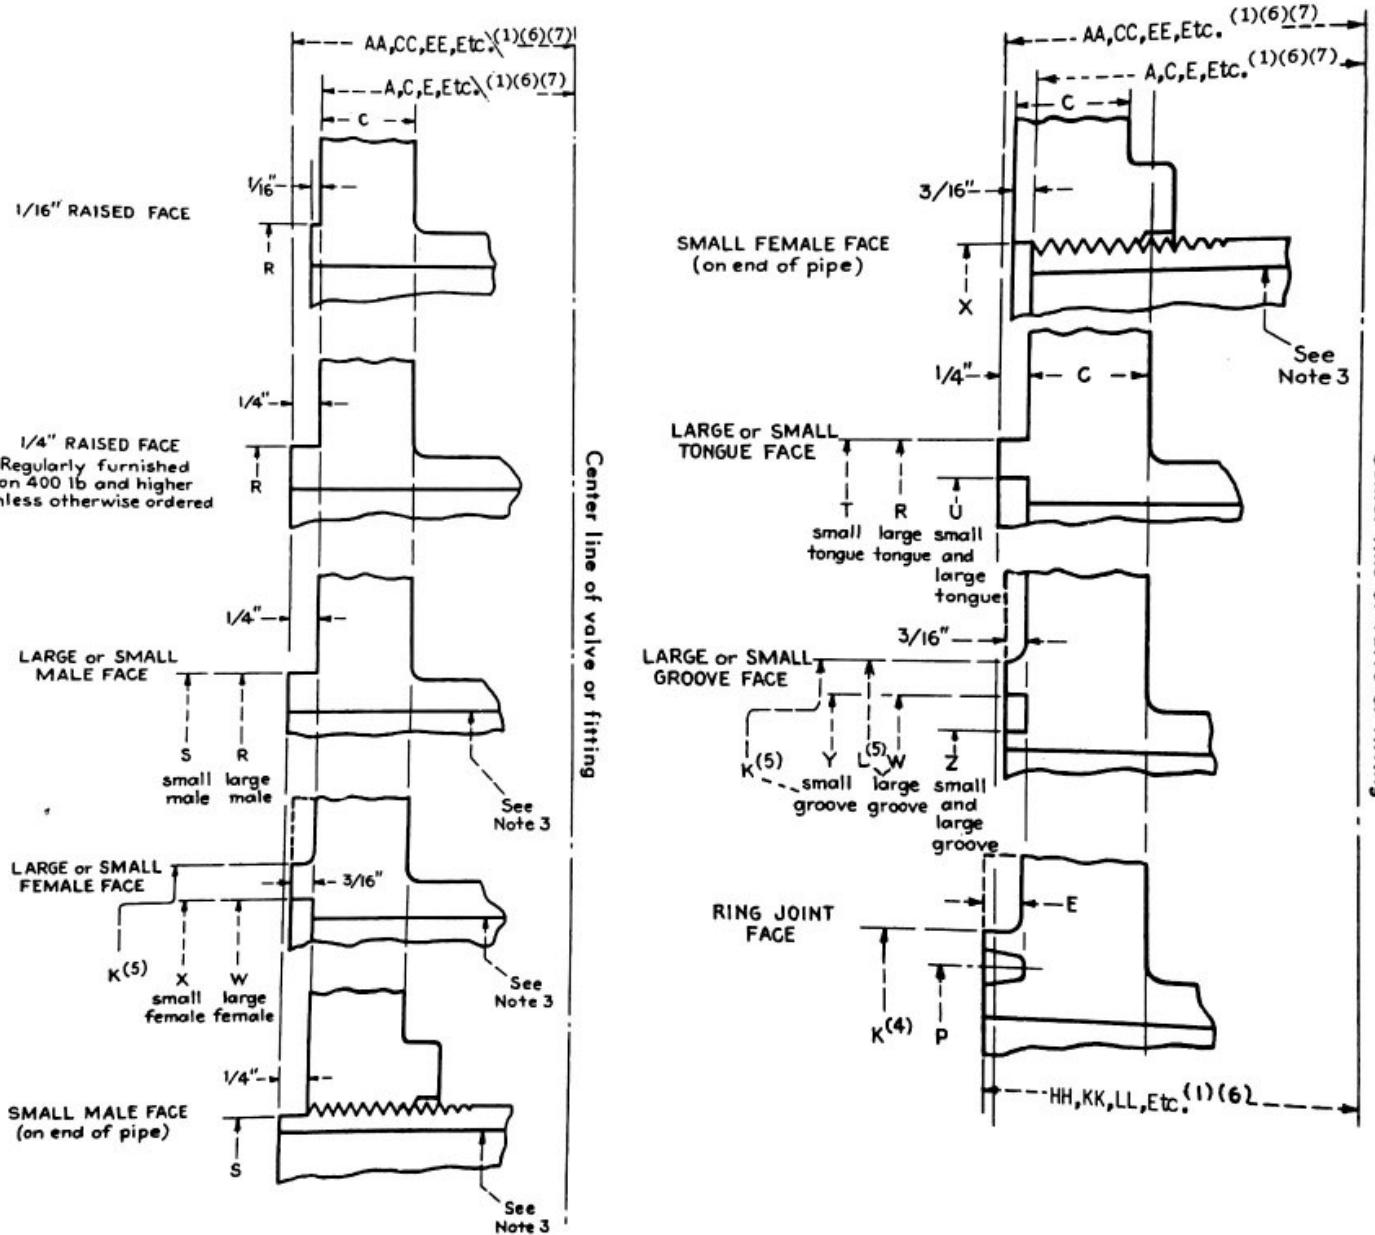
(continued) END FLANGE FACINGS AND THEIR RELATIONSHIP TO FLANGE THICKNESS AND END-TO-END DIMENSIONS (See page 21 for notes)
